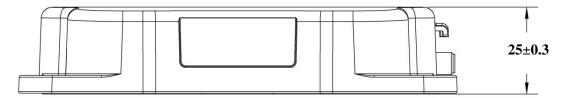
Packaged Standard Antenna Height Dimensions (mm)
